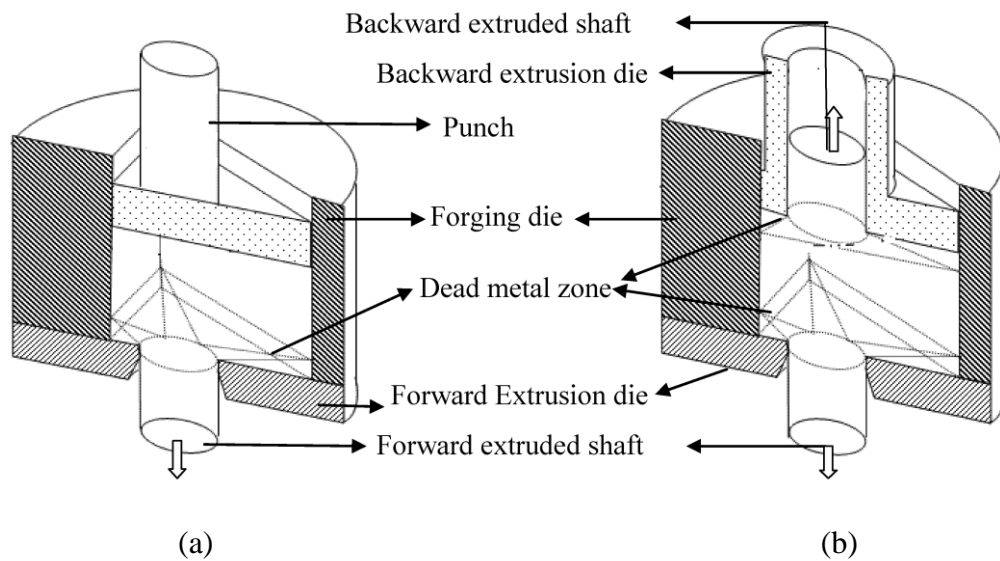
Front half section of the process (a) Forward extrusion-forging (b) Forward- backward extrusion-forging process
